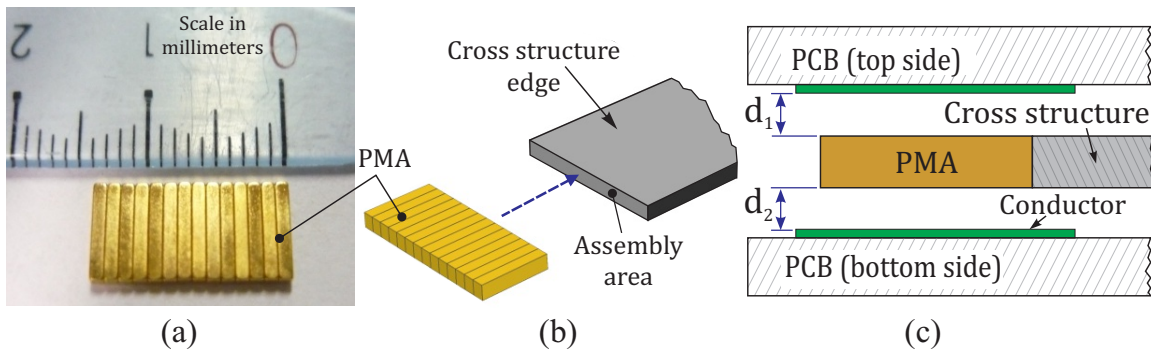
(a) Real view of a single PMA (b) Assembly approach (c) Implementation of top and bottom PEDCs over PMA
